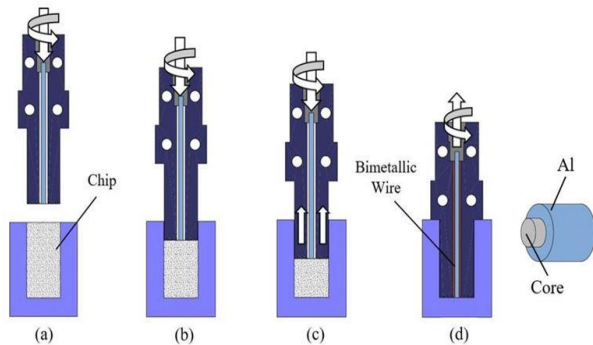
Steps of modified friction stir extrusion to produce double-layered wires: (a): inserting the raw material inside the die, (b): initial penetration, (c): extrusion, and (d): wire formation.
